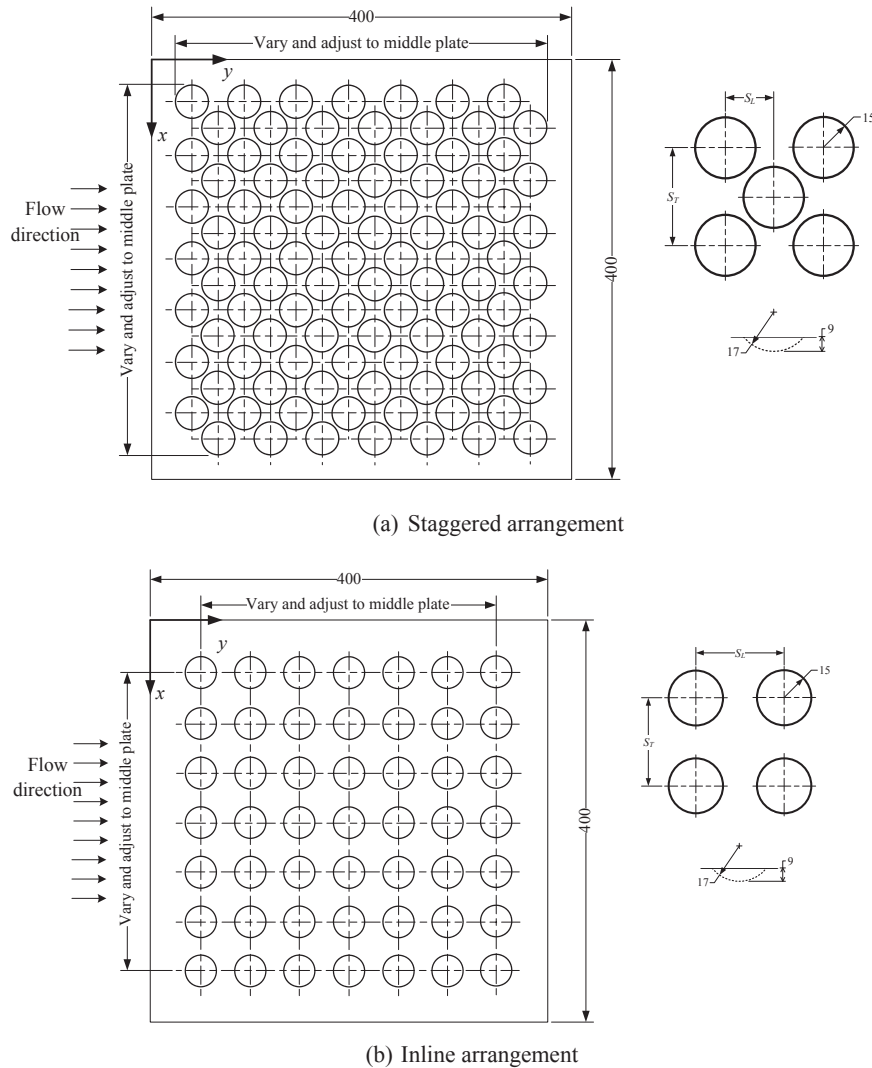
Details of tested surface (all dimensions are in millimeter).
